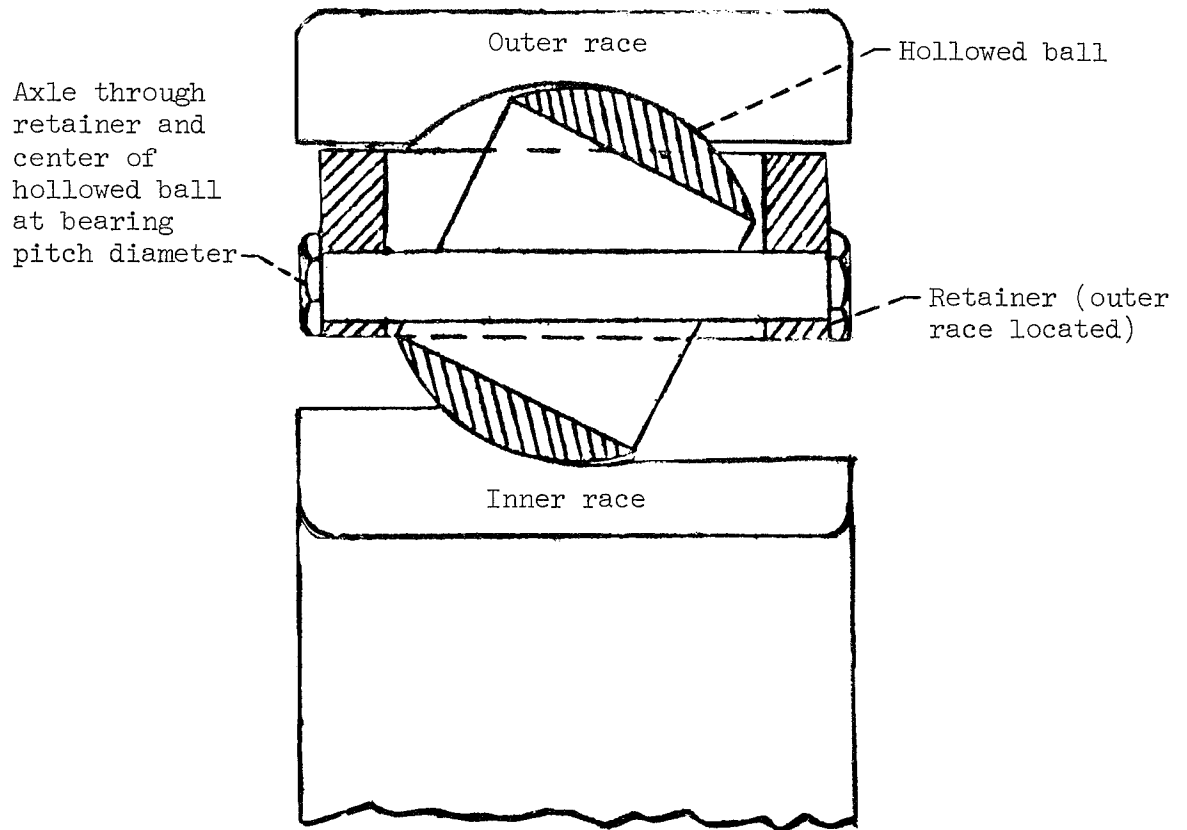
Section view of test bearing showing hollowed ball and mounting detail.
